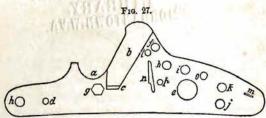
Lock-plate, half size, showing the position of the holes, &c. a, cone-seat notch; b, bolster; c, mainspring notch; d, hole for mainspring pivot; e, hole for arbor of tumbler; f, hole for cover-catch; g, hole for cover hinge stud; h, h, side-screw holes; i, hole for bridle-screw; j, hole for sear-screw; k, hole for sear-spring; l, hole for catch-spring screw; m, sear-spring stud-mortise; n, feed-finger slot; o, bridle pivot hole; p, feed-finger-spring-screw hole.
